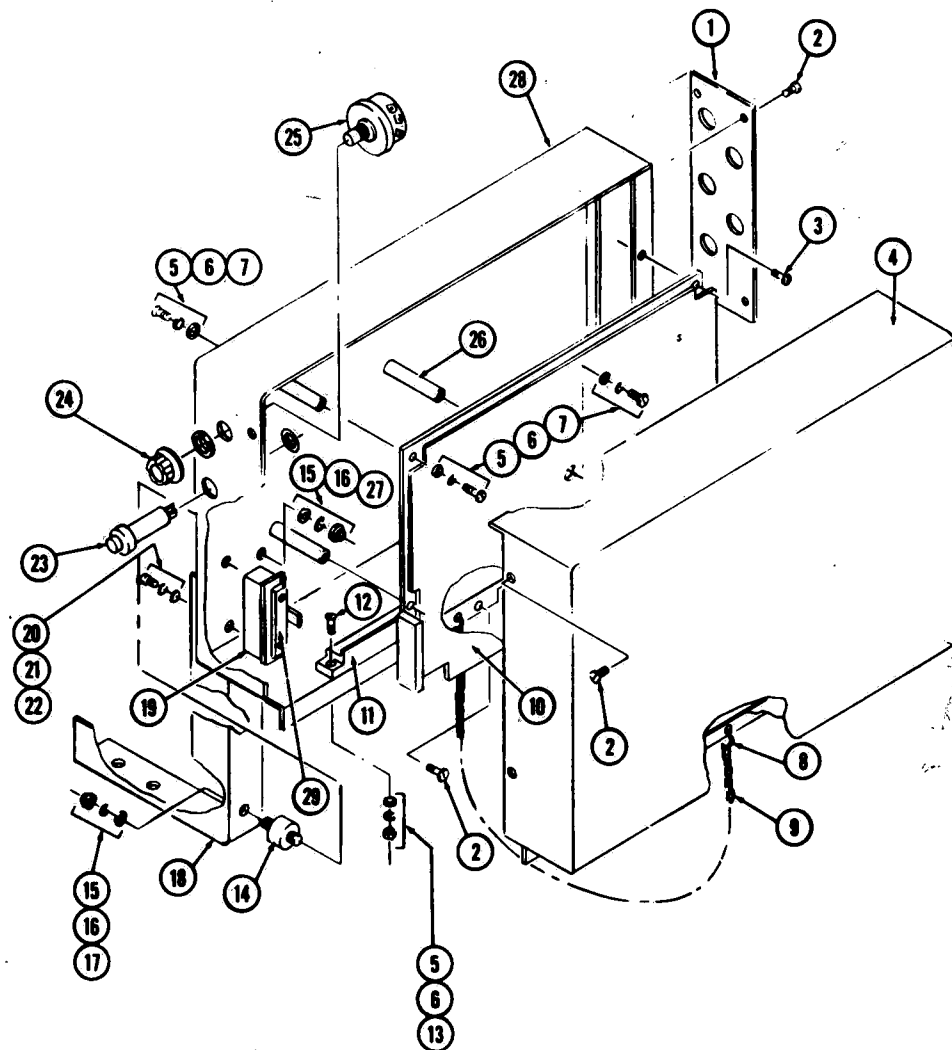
RELAY BOX ASSEMBLY: Power Door.
